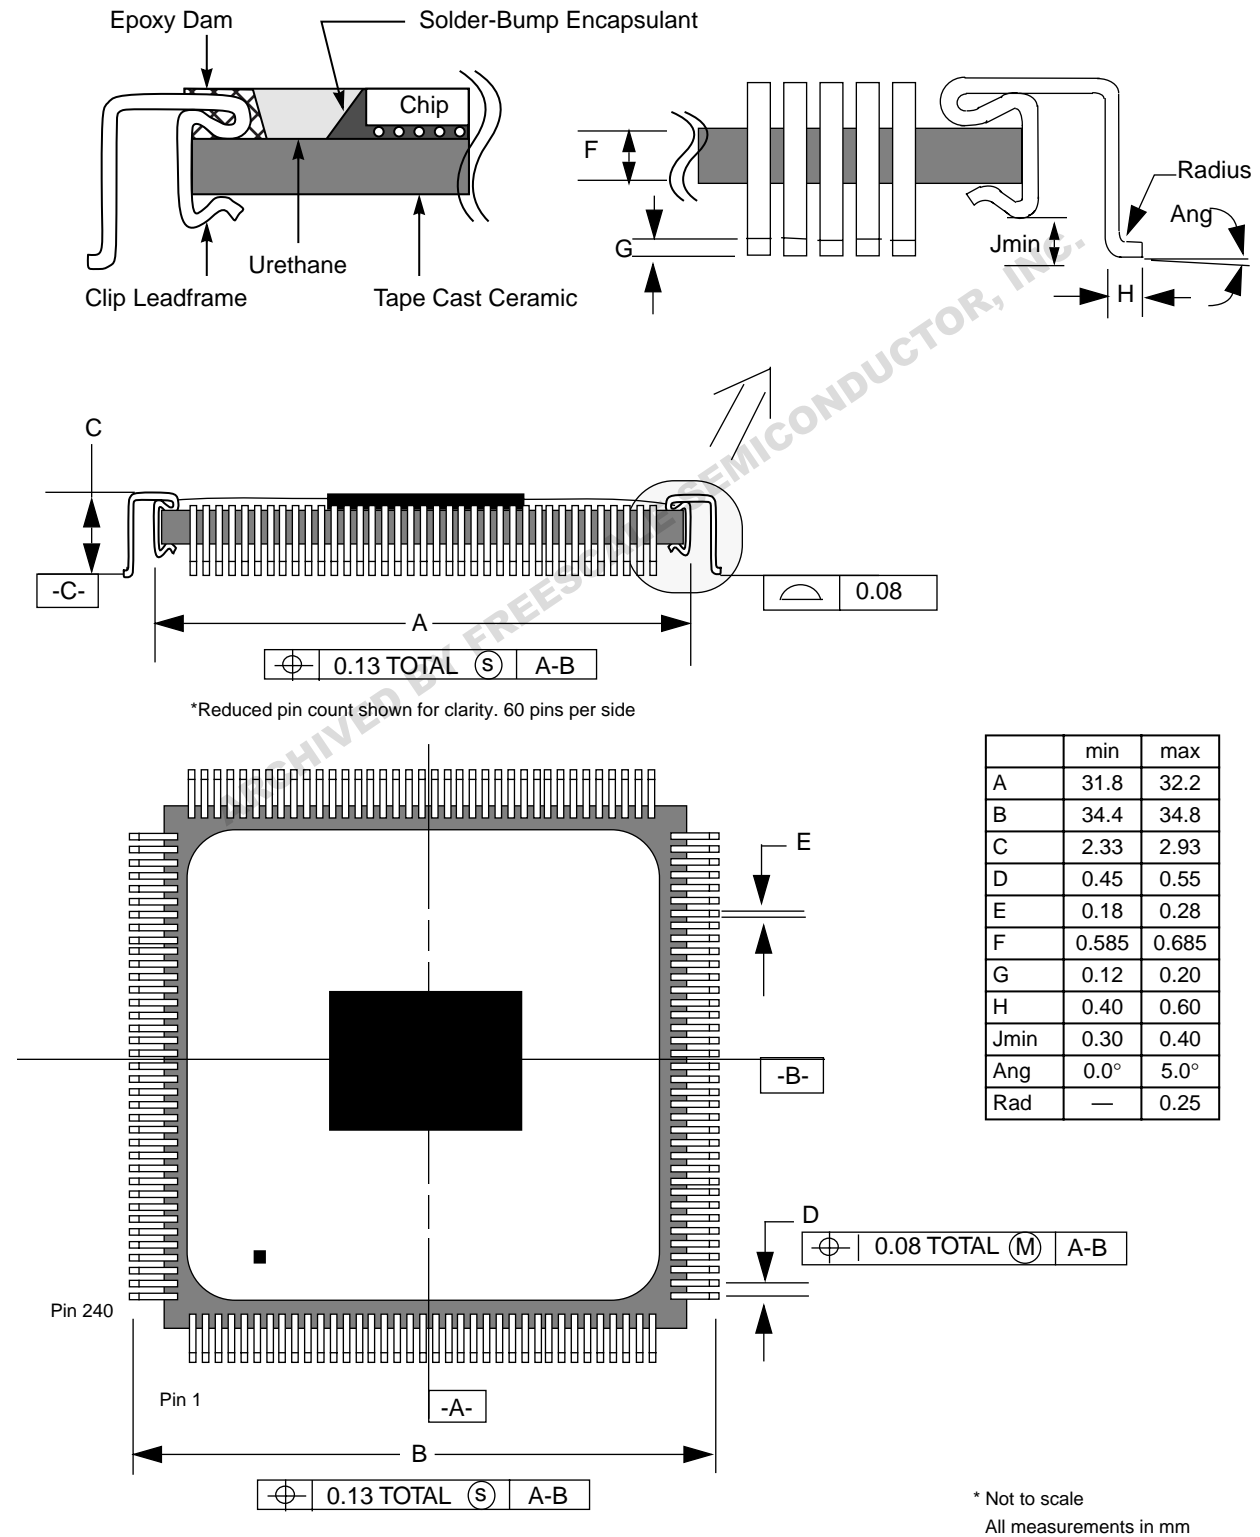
Mechanical Dimensions of the IBM C4-CQFP Package
